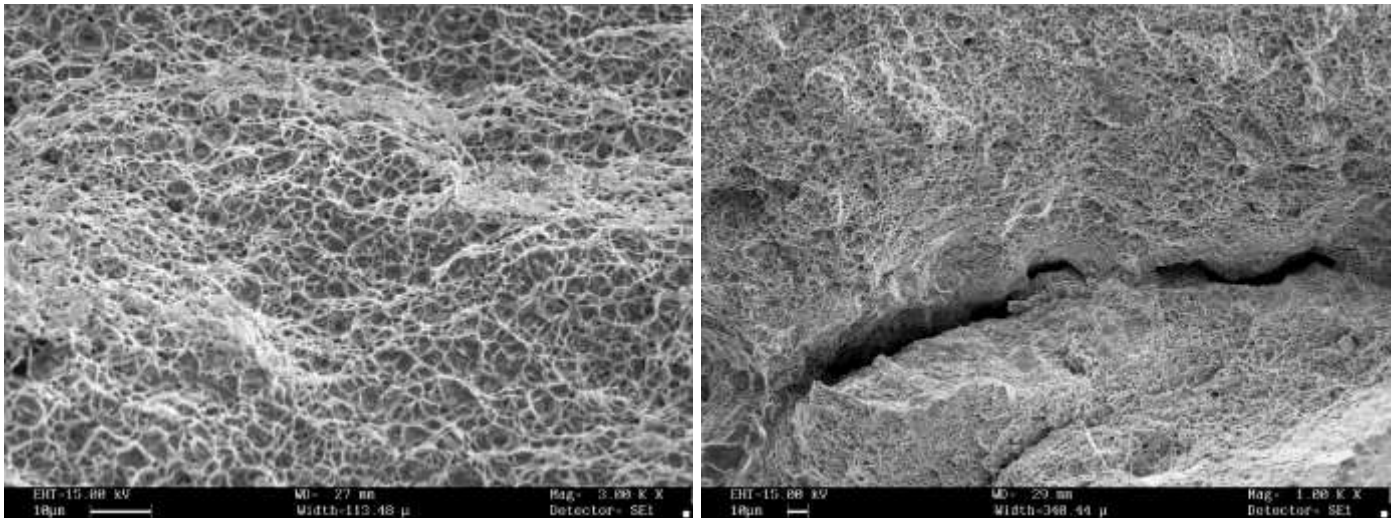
SEM picture of MIG welded sample 'as weld' fracture surface
